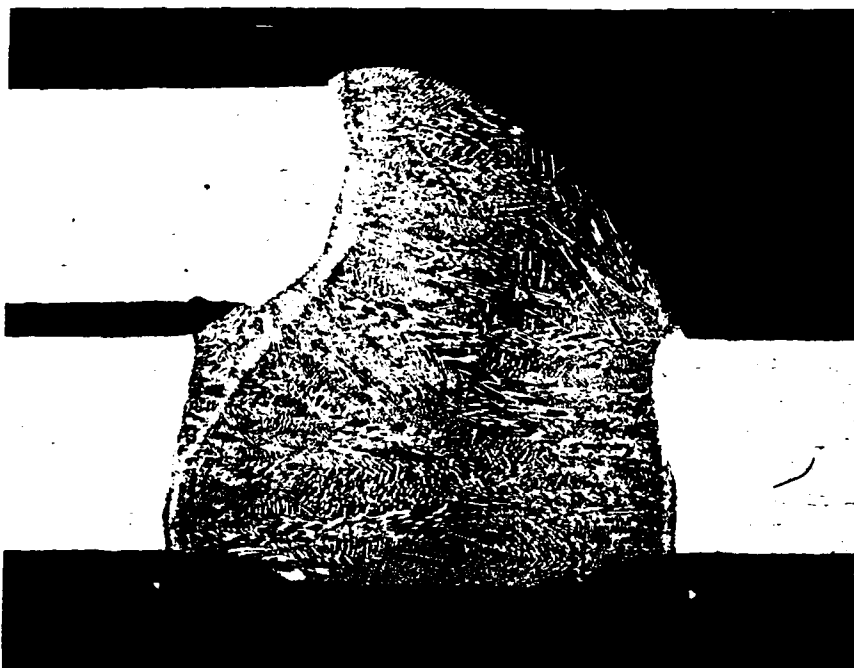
Metallographic cross section of a typical 90° fillet weld of .040" Hastelloy X to .040" Hastelloy X. The weld fillets were slightly convex. Mt. No. 90-515, Mag: 26X, Etchant: Glyceregia
